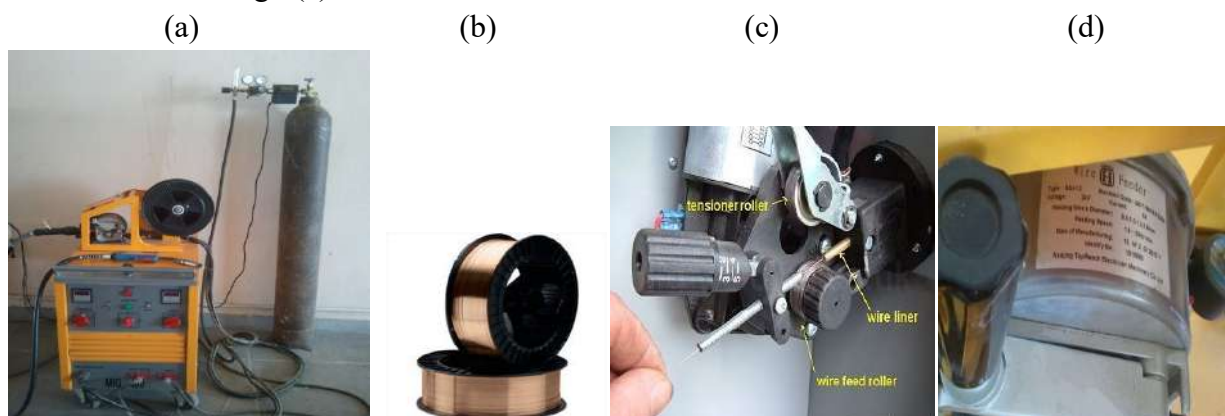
(a) MIG Welding set up, (b) M.S. Cu coated wire, (c) Wire feeder unit, (d) Wire feeder unit description
